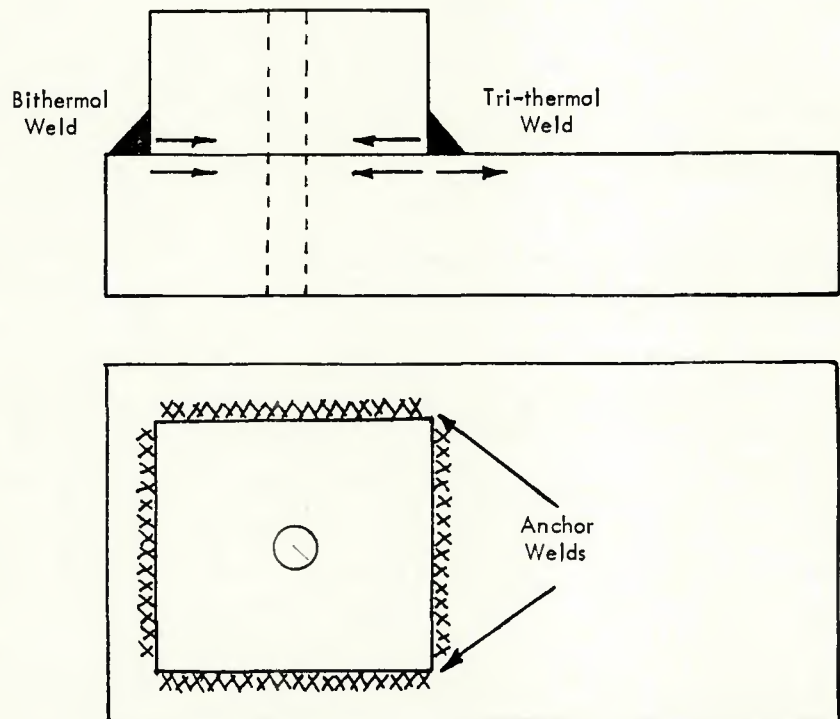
Sketch showing heat path flows and anchor welds on CTS test
